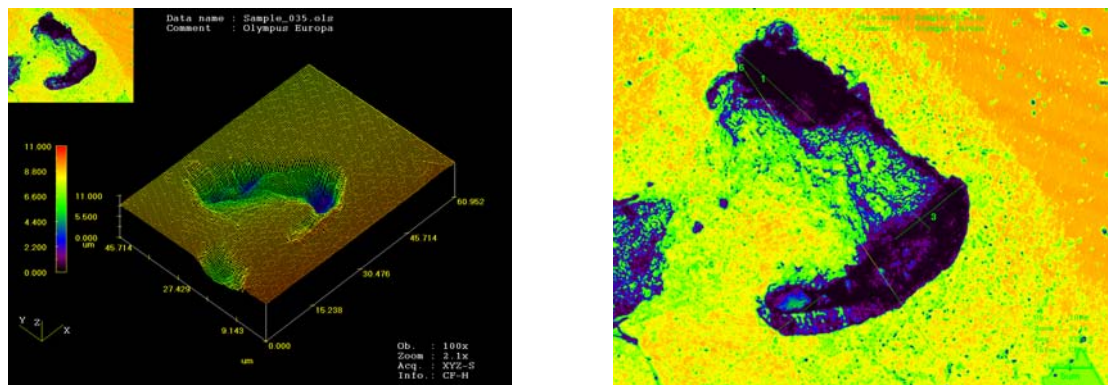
Casting defect, confocal laser scanning microscope
